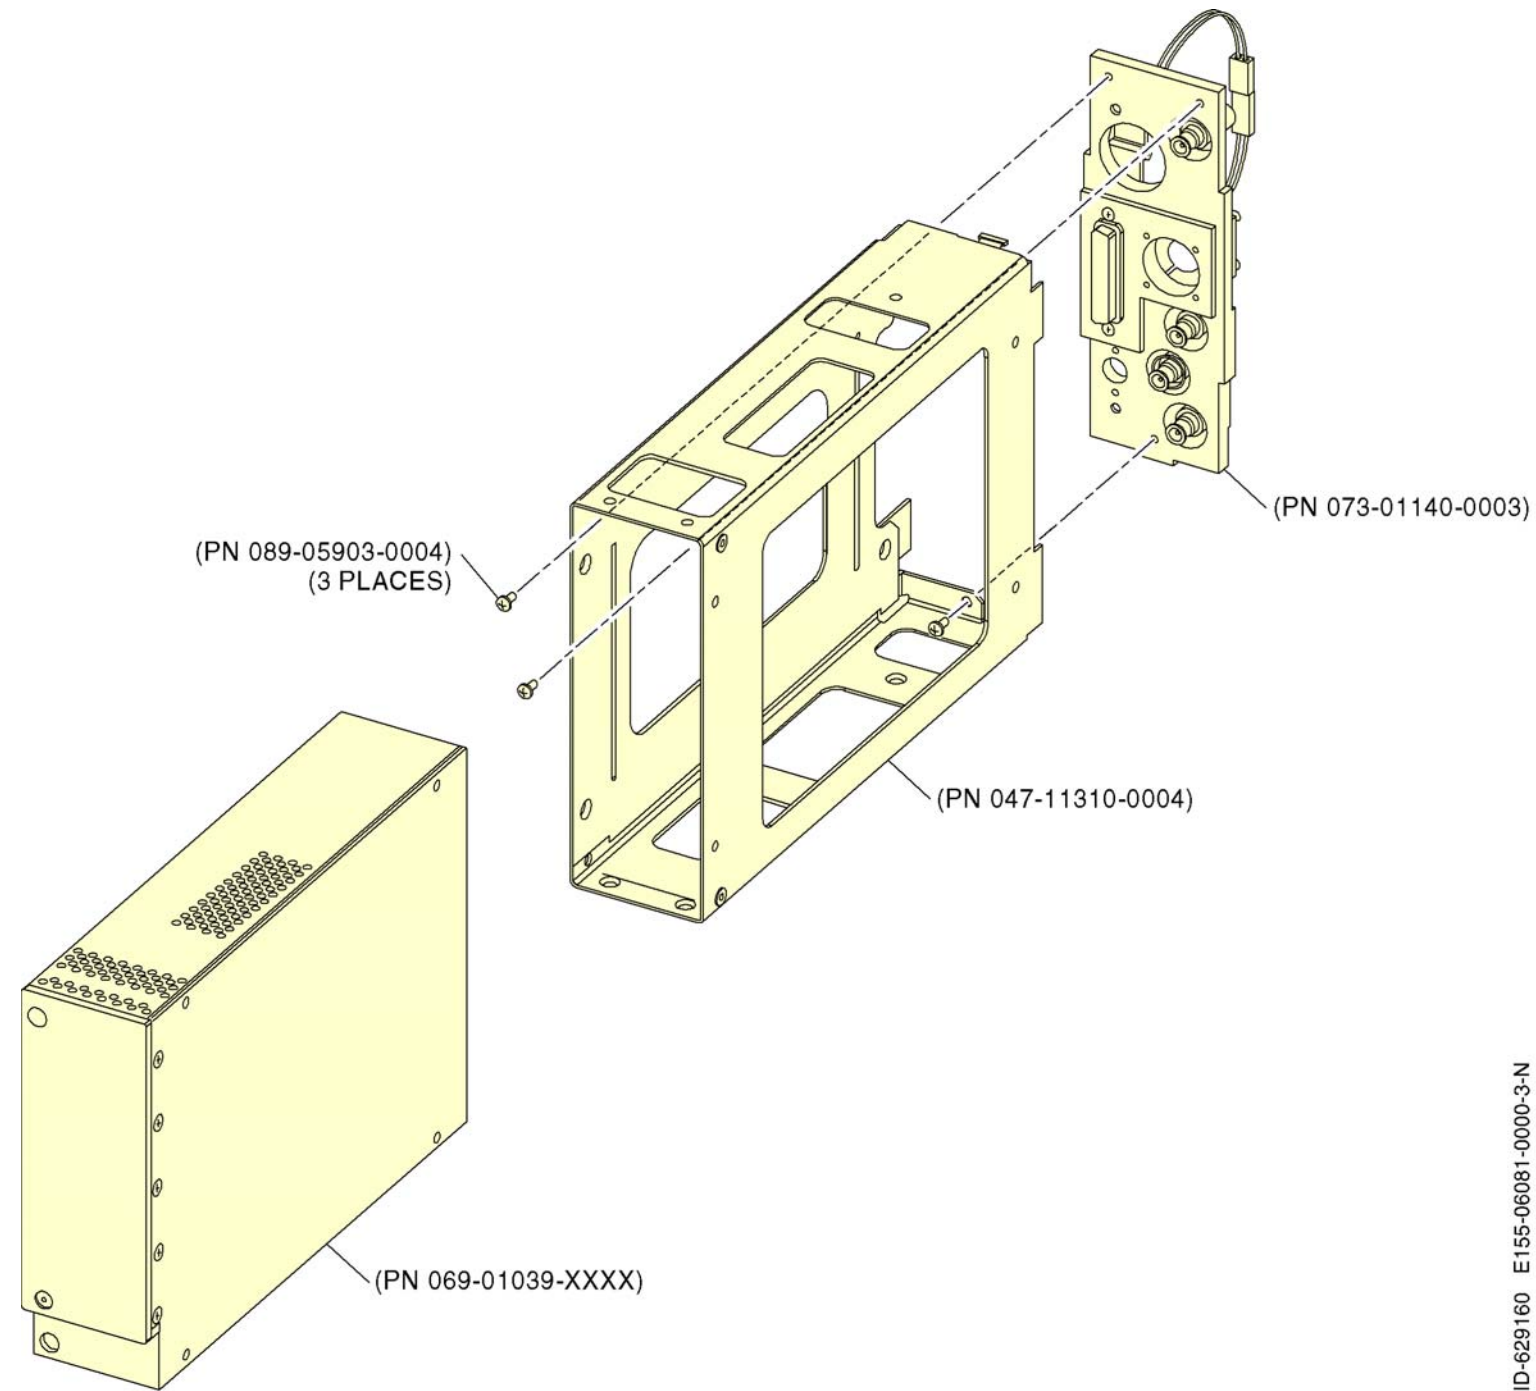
(Sheet 2 of 4) KTR 2280A Installation Drawing
